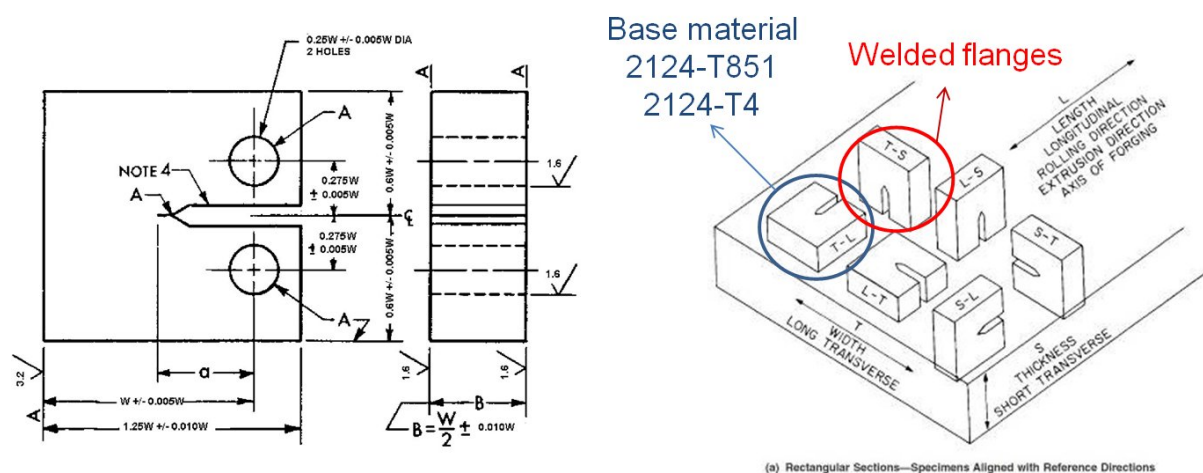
Left: compact tension geometry used for fracture toughness testing of application 2; Right: sample location relative to the plate dimensions.
